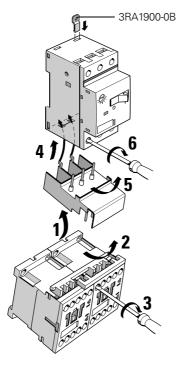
screw-mount attachment, fuseless load feeder (frame size S00)
